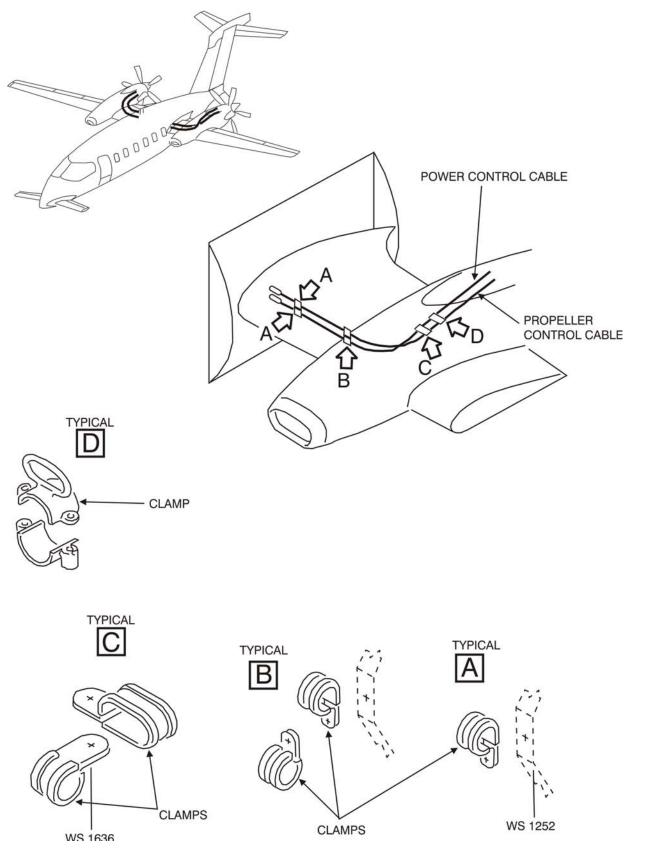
Engine Control Cables - Inspection (Sheet 3 of 5)
